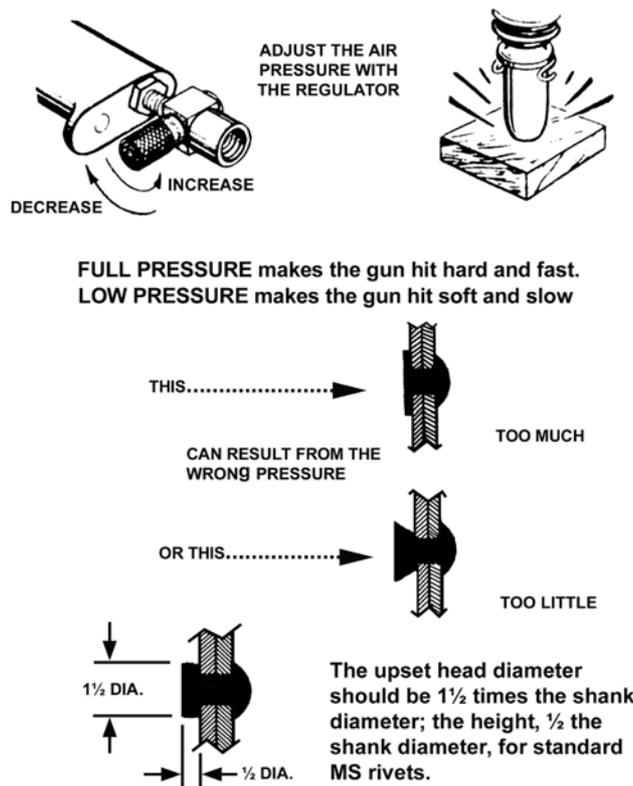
, Adjust the air regulator that controls the hitting power of the gun by holding the rivet set against a block of wood.
